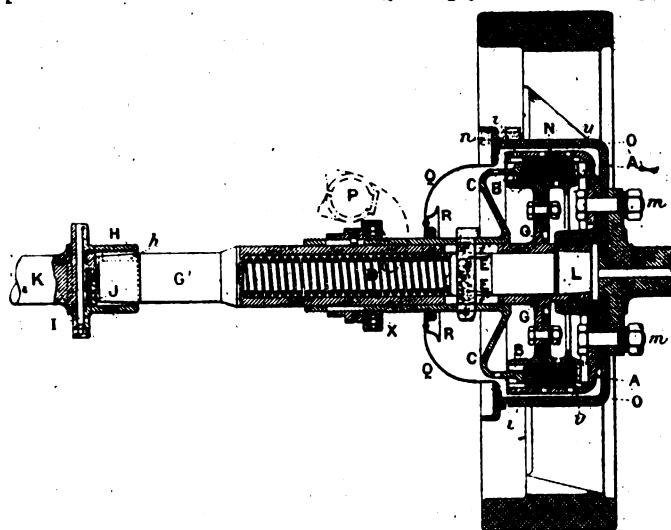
Sectional View of Panhard Multiple Disc Clutch.
